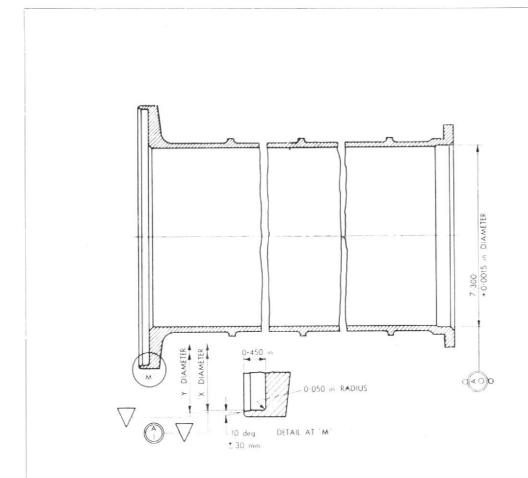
Checking concentricity of safety bearings and labyrinth bush.
